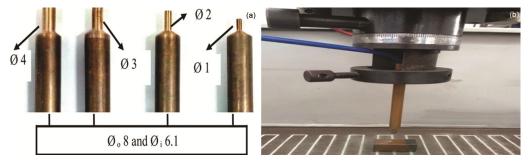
(a) — Hollow copper electrodes of different dimensions (all dimensions in mm), and (b) Tool setup.
